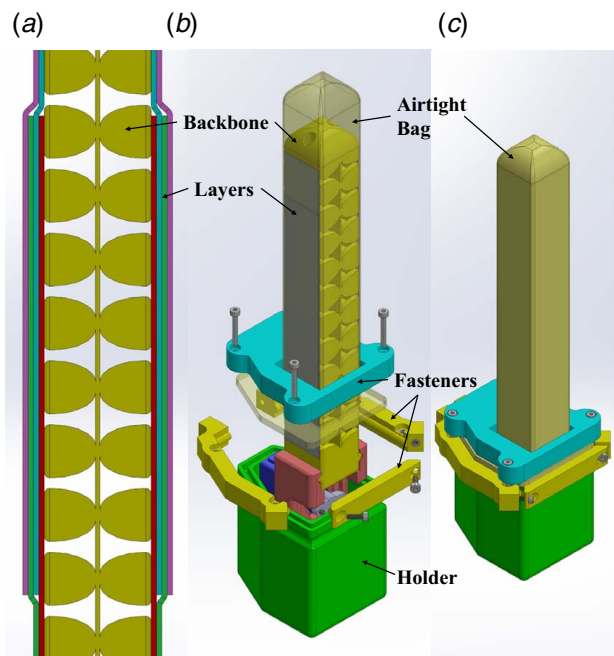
(a) Interlocked layer configuration, (b) isometric exploded view of assembled finger with transparent bag, and (c) isometric view of assembled finger
